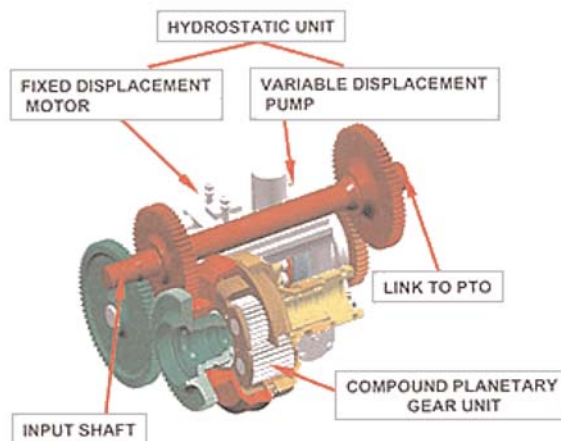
Steyr CVT gearbox - parts and power split figuration
